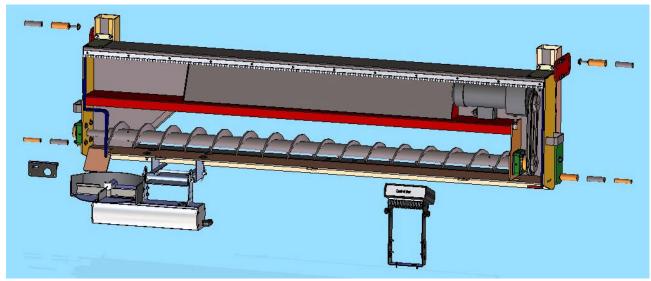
TC-140 D-ICER with Access Cover Weldment removed
